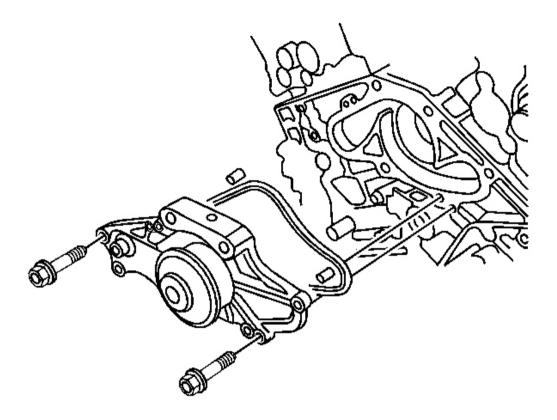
View Of Water Pump Assembly Bolts Courtesy of GENERAL MOTORS CORP.
